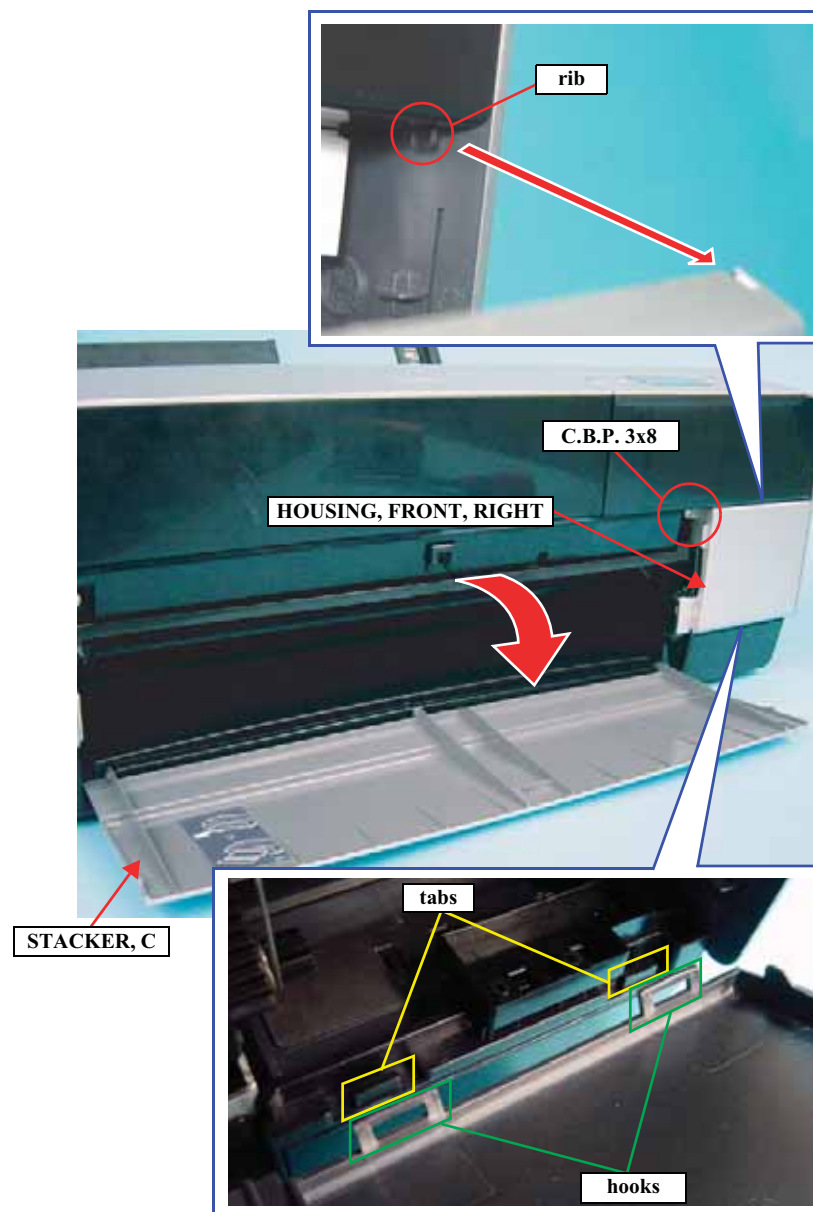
Removing the HOUSING, FRONT, RIGHT
